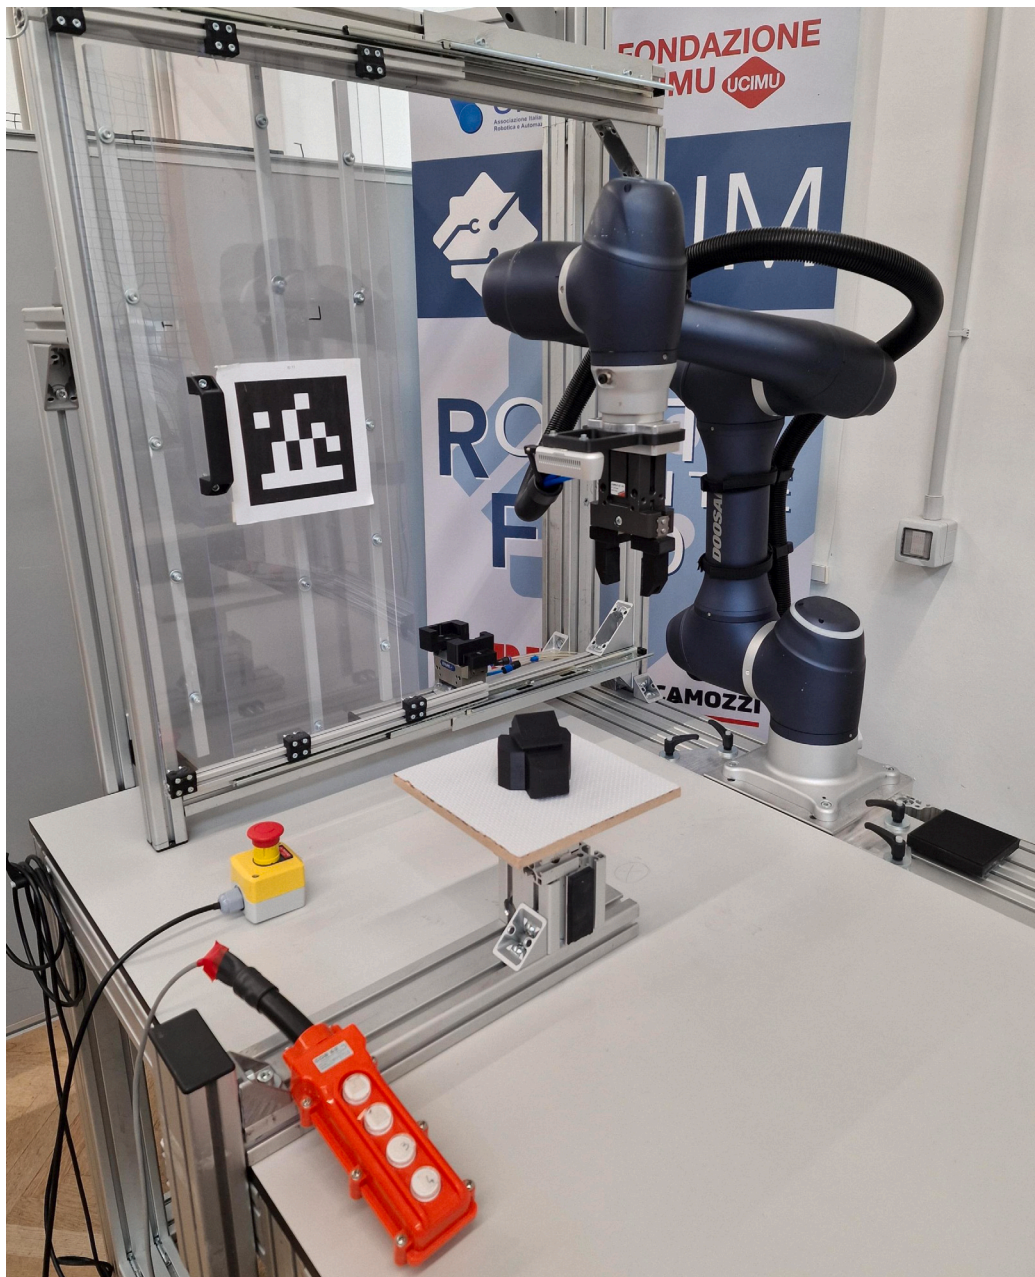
Experimental setup, consisting in a Doosan A0509 robot, a mockup machine tool, an in-hand mounted Intel Realsense d435i camera, a push-button user interface, and the workpiece to be loaded in the machine.
